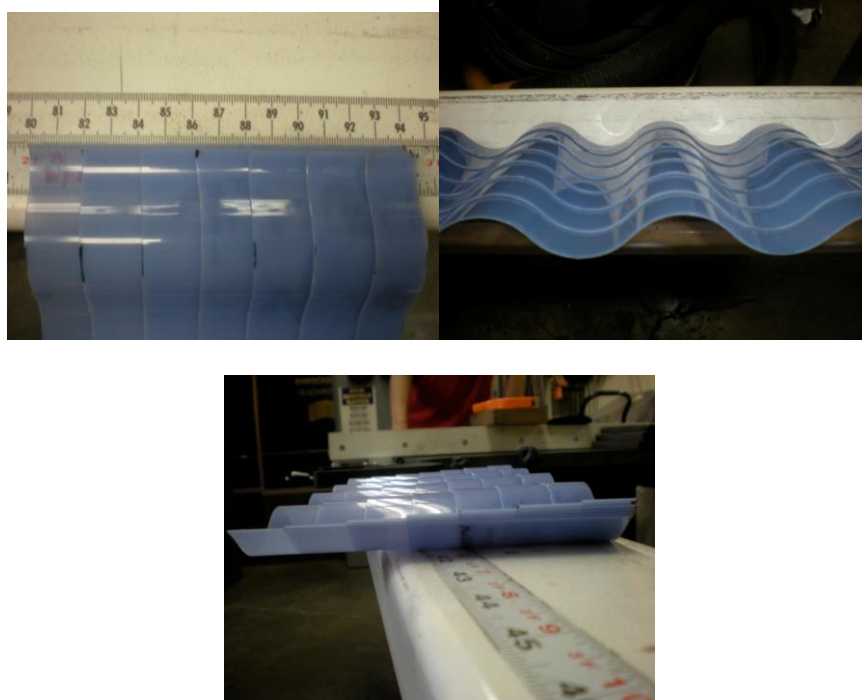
PVC sheet spacer with scale bar (top left). Front view, showing where sheets would slide in from (top right). Side view, showing stair-like constructing of the sheet spacer, where PVC sheets to be drilled would slide in from the left (bottom).
